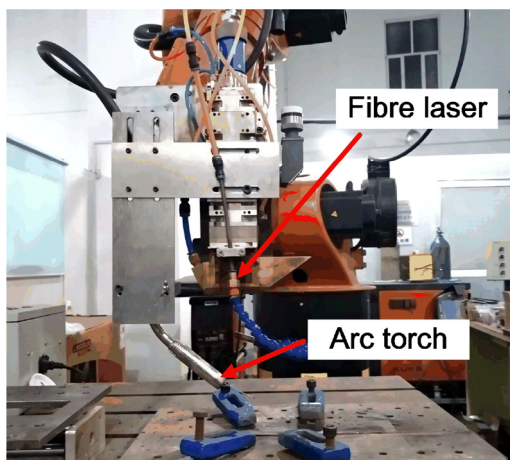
Laser-GMAW hybrid welding system.
